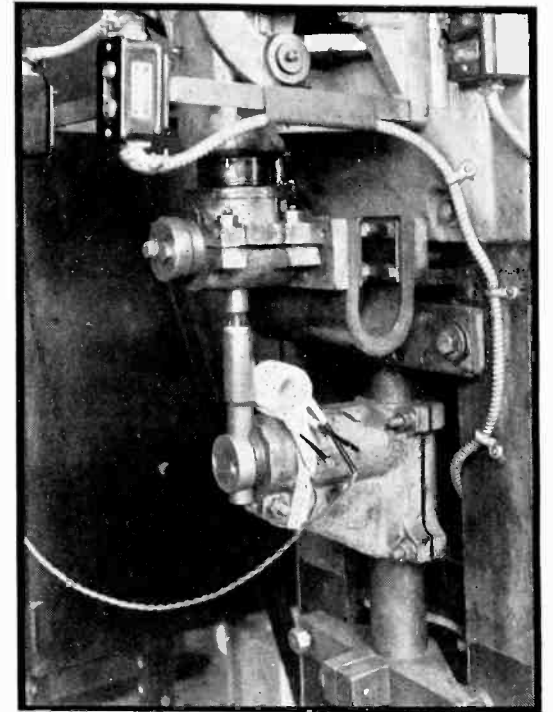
Pick-up coil on 150 kva. welder
